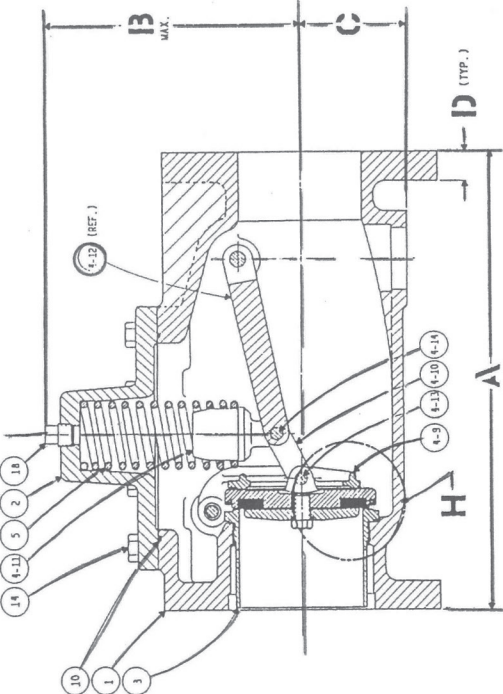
3084 CHECK VALVE SHOWN (SIDE VIEW)
